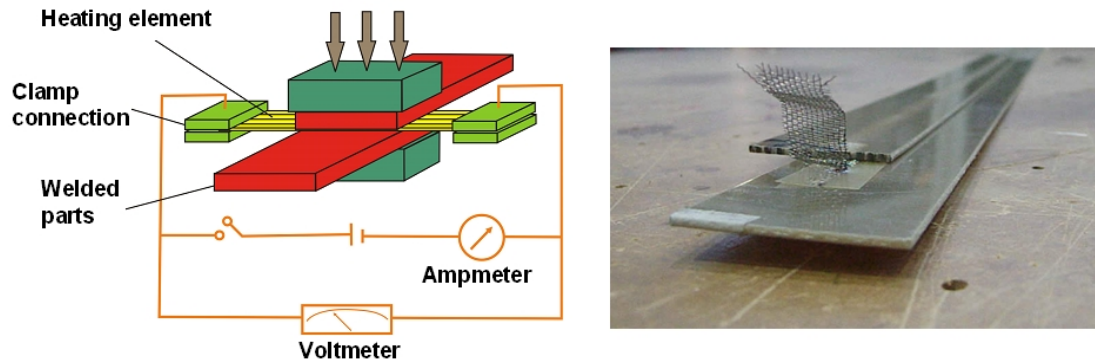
Resistance welding of thermoplastic composites. Left: process schematics, right: welded parts.
